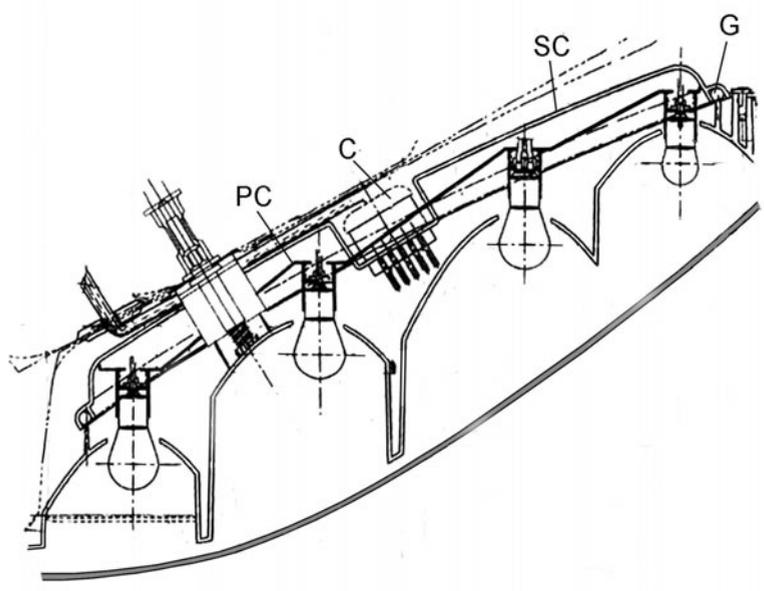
Section of a tail lamp. PC: bulb holder plate with printed contacts; C: system connector; SC: internal removable cover.
